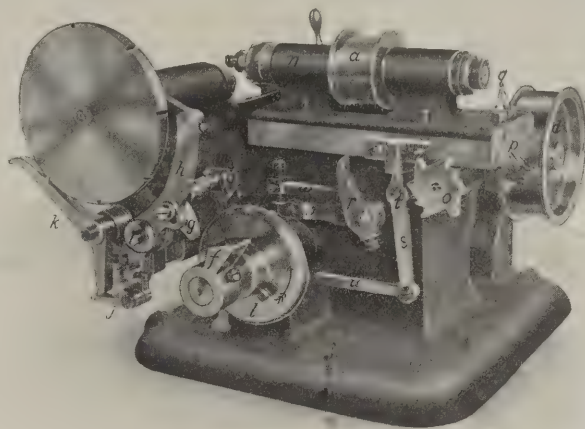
Side View showing Operation of Cutter Shifting Mechanism.
